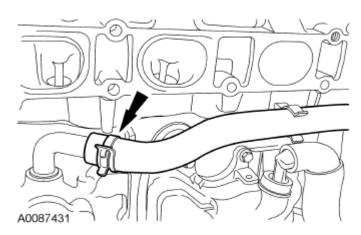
Identifying EGR Tube Courtesy of FORD MOTOR CO.
